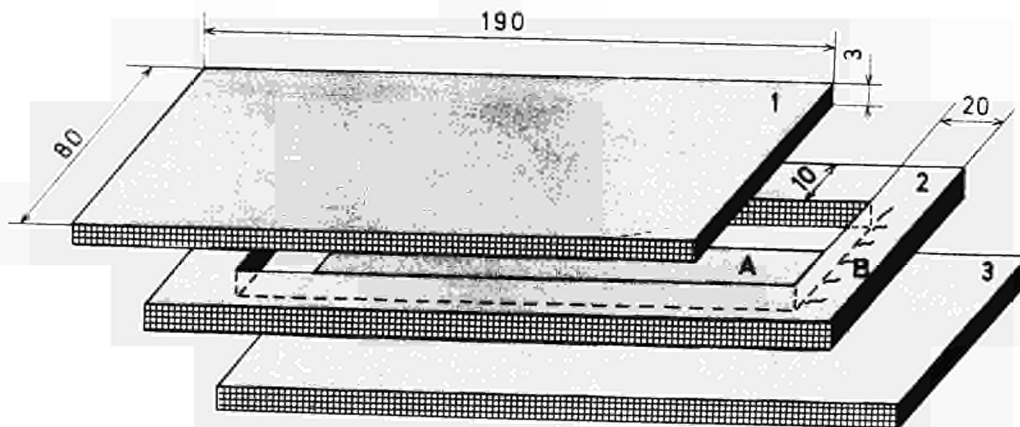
Initial sandwich for the fabrication of MTR plates.
